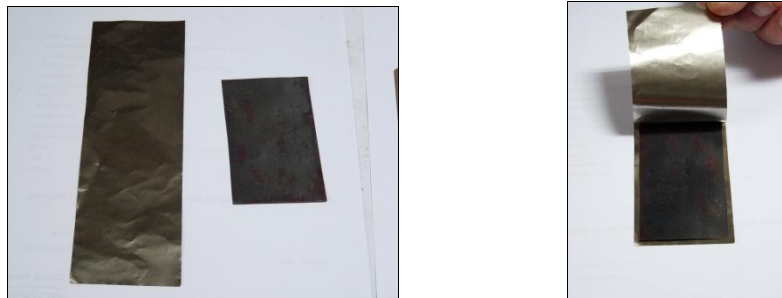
Assembly of the Ni+Cu+Ni foil liner.
